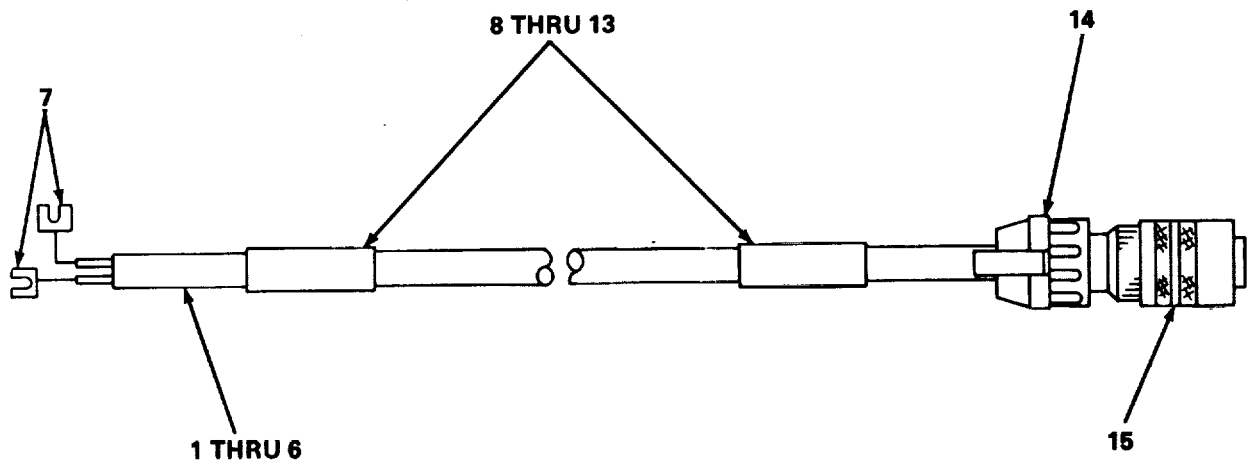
Cable Assemblies 1703-1-2135 (GR1-GR6)
